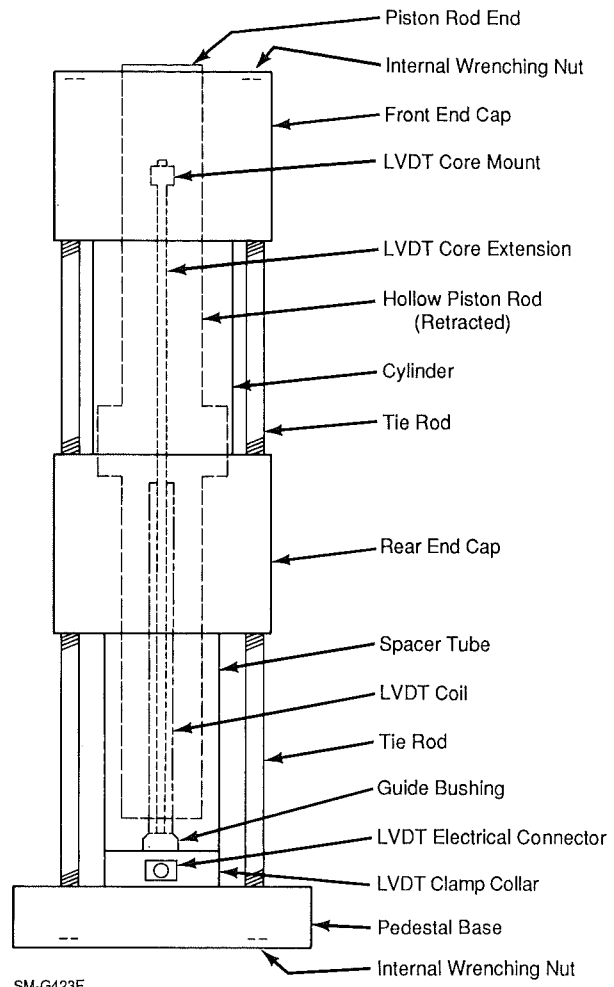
Closed Housing LVDT – Pedestal Base Illustration
